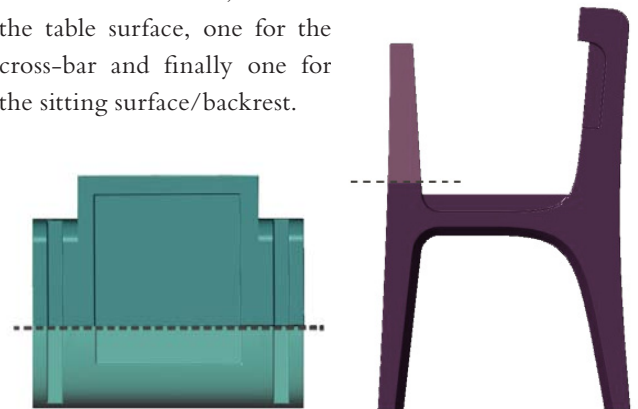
The sitting surface and backrest are produced in the same mould, as is the two h-shapes.
